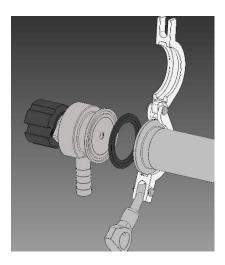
SAMPLE VALVE INSTALLATION
